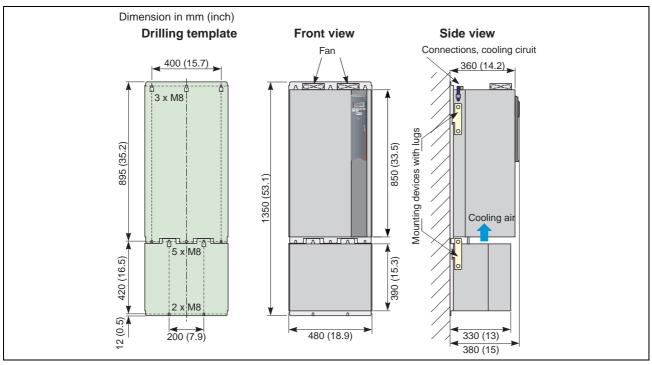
Dimension drawing converter size class G without heat exchanger
